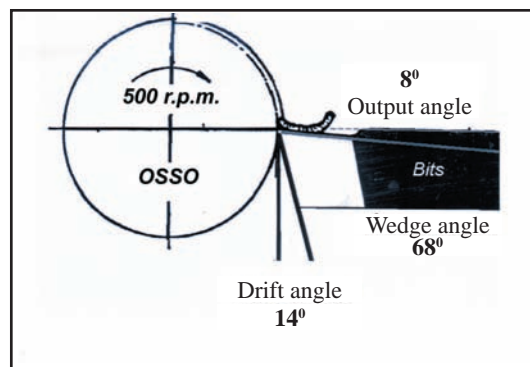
Scheme illustration of wedge, chip output, and main incidence or tool drift angles (bits) used for bone machining.
